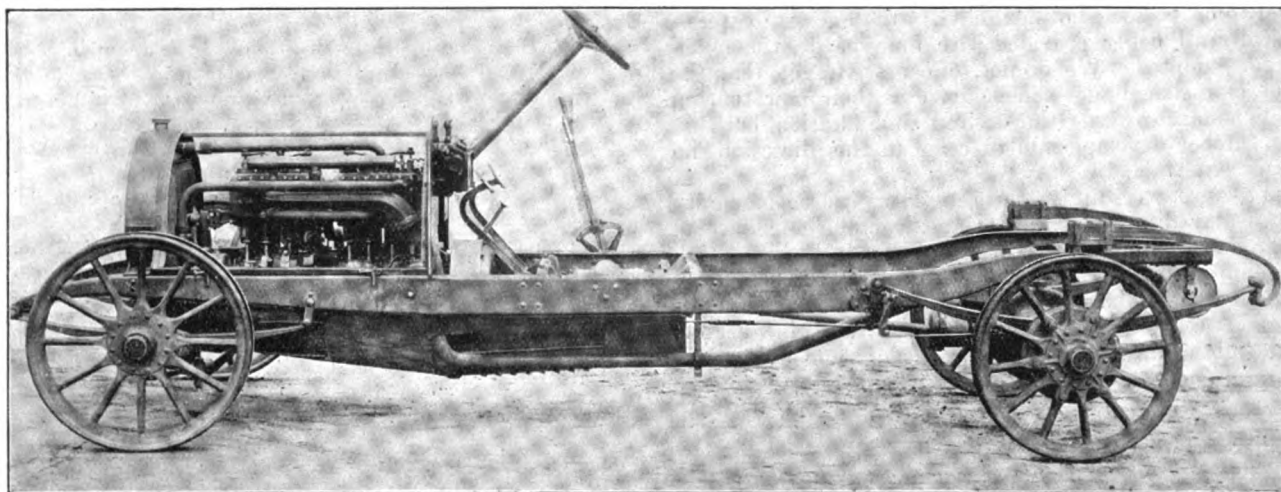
Chassis of new Hotchkiss 20-30-h.p. Car. The engine, which comprises four cylinders cast in pairs, 110 mm. bore by 130 mm. stroke, develops about 40-h.p.
